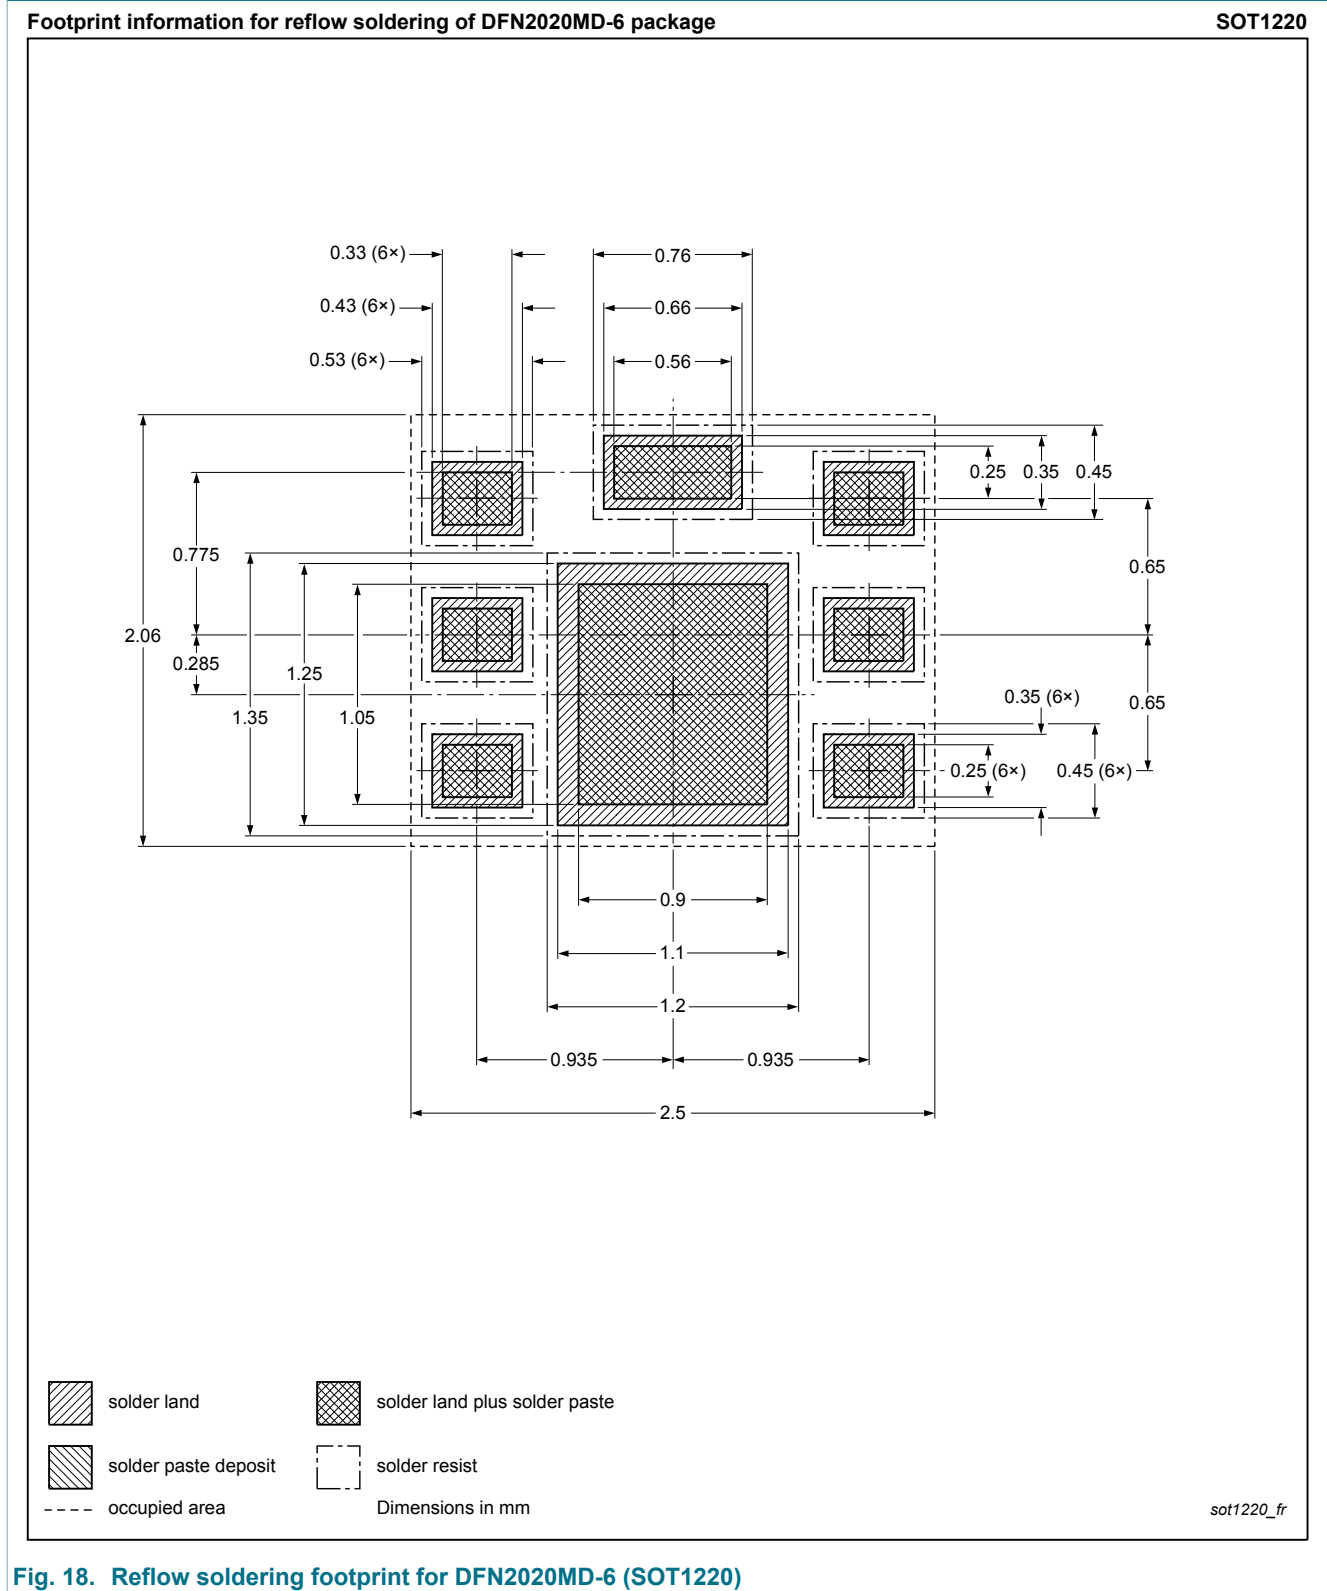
Reflow soldering footprint for DFN2020MD-6 (SOT1220)
